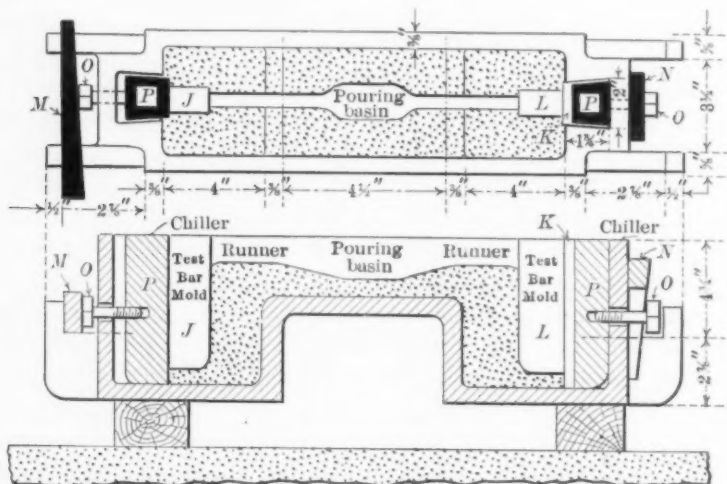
MOLD FOR MAKING CHILLED TWIN SPECIMENS FOR FRACTURE TESTS
